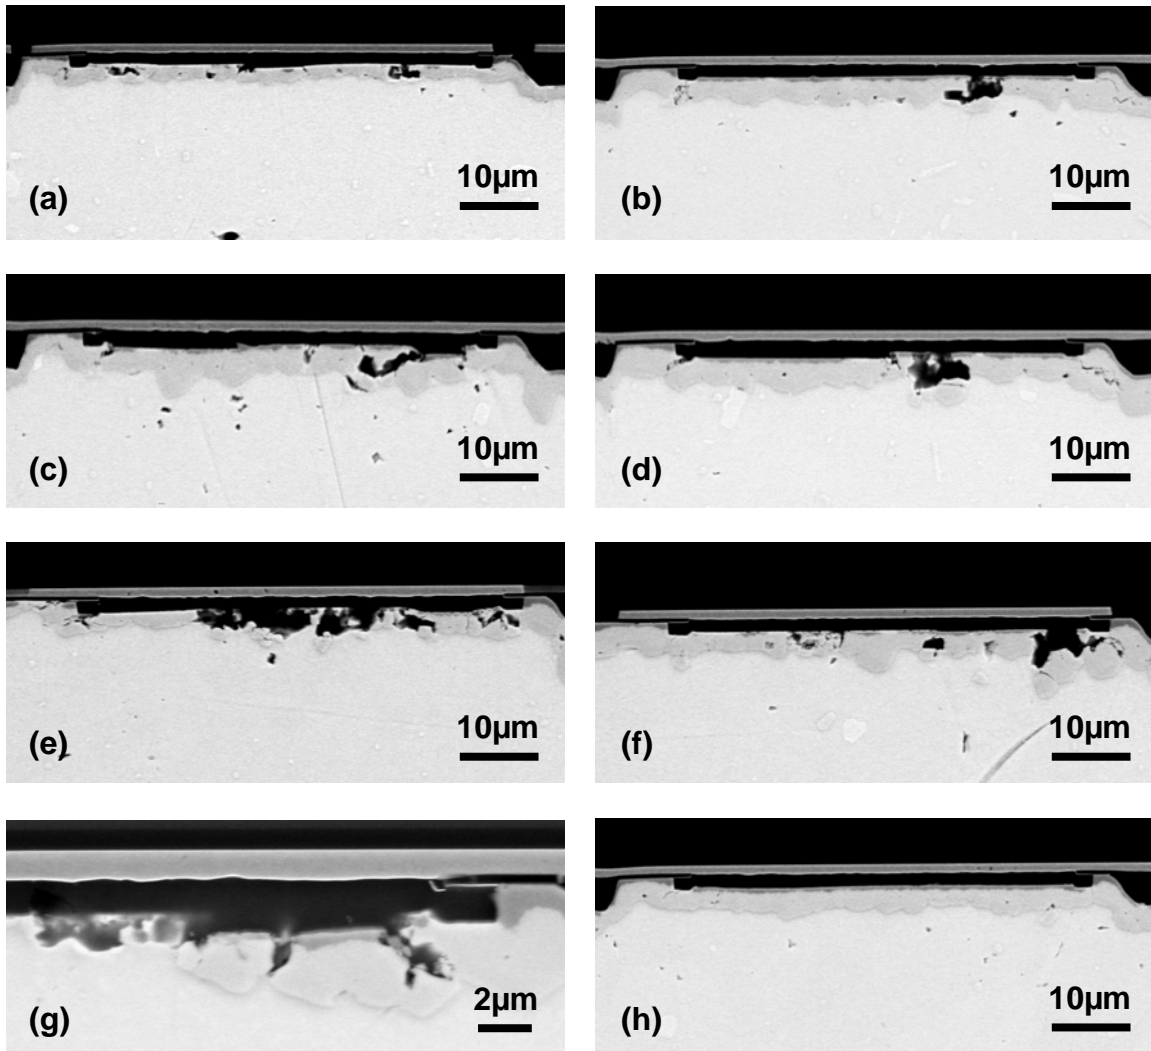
Solder joints with Ni UBM in Sample C after 69 days of TM stressing. (a)-(g) show 7 solder joints with voids. The other 20 solder joints without current stressing had no voids as shown in (h).
